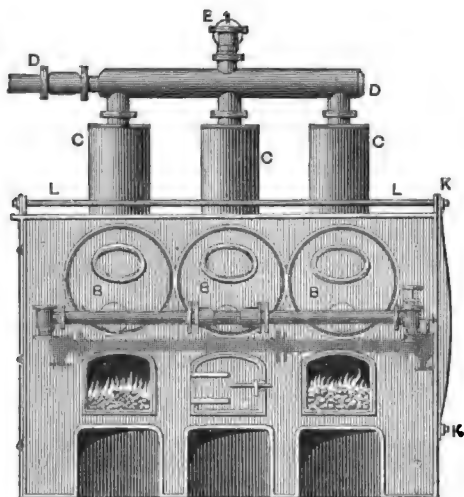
FRONT OF CYLINDRICAL BOILER AND SETTING.
